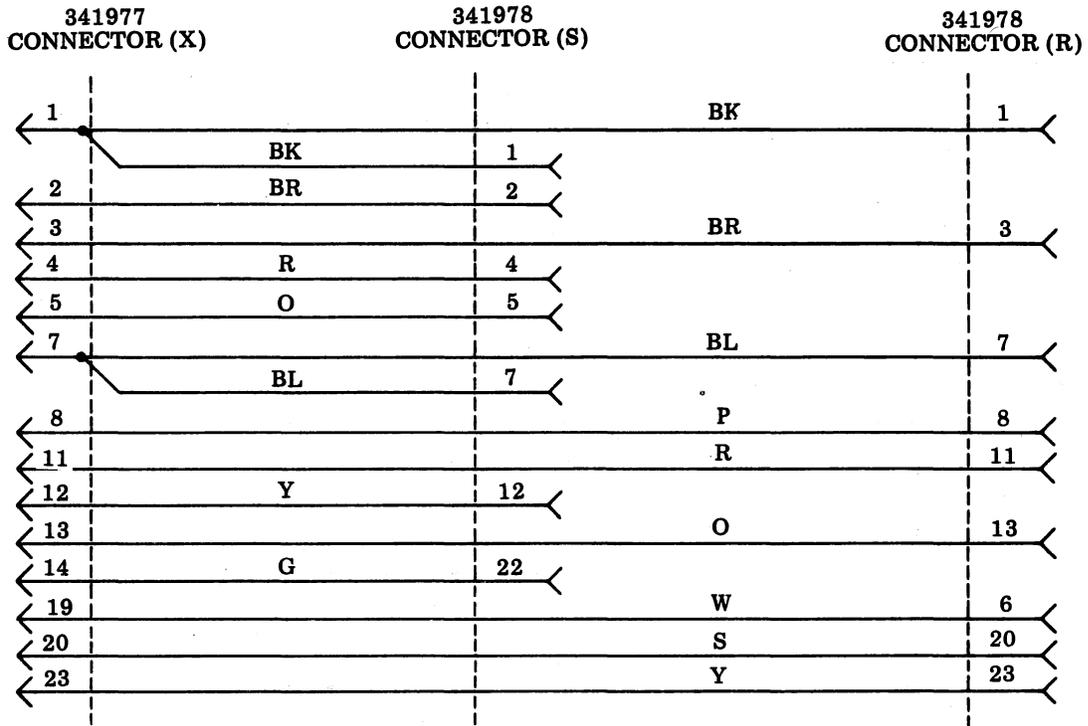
345603 Interface Cable Assembly (KD, KDP, KD-ROP)
